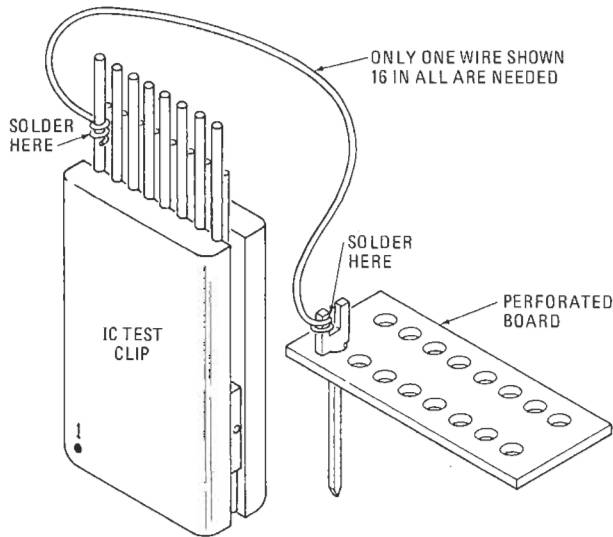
IC TEST CLIP can be modified with a piece of cable and a homebrew jig to plug directly into an IC socket.
